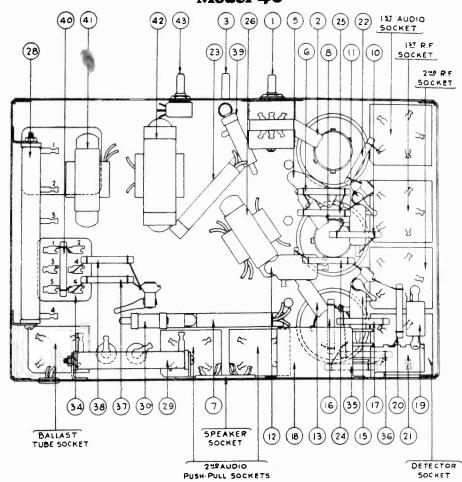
Bottom View of Chassis, Showing Parts, and Position of Compensating Condensers Located,—and Reached,—from Below Chassis
